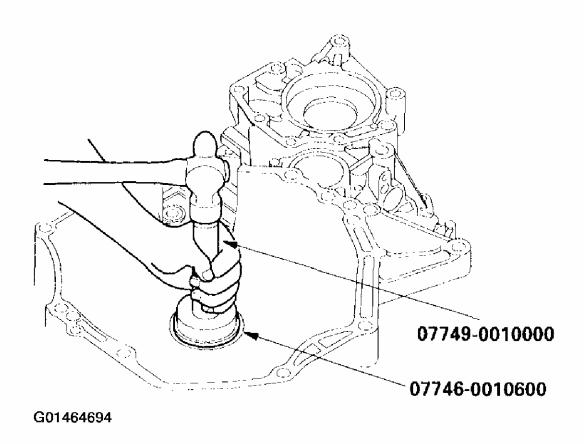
Installing The Oil Seal Courtesy of AMERICAN HONDA MOTOR CO., INC.
